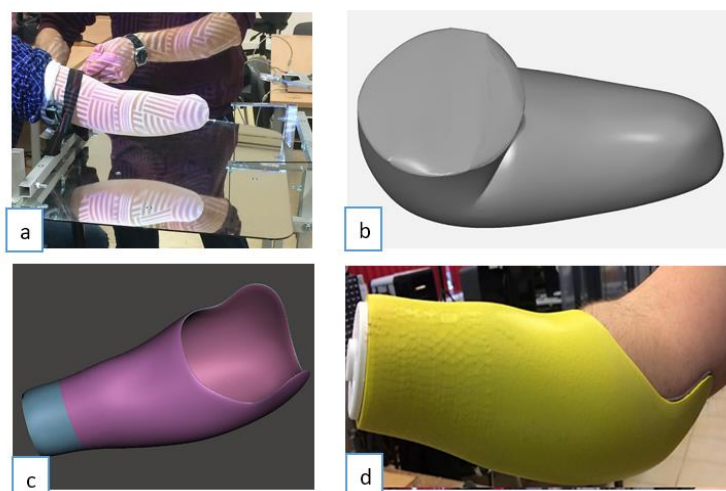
3D scanning and printing of a transradial socket (a) scanning process (b) scan model into CAD software (c) CAD modeling of the socket (D) 3D printed socket [2].
